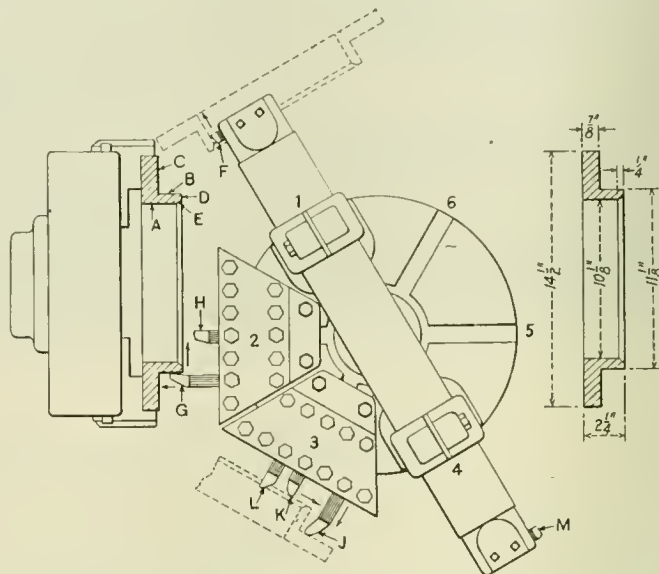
Tooling of Combination Flat Turret Lathe for Machining Packing Ring
